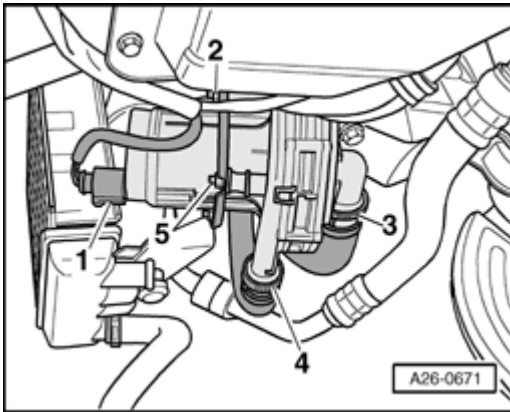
Identifying Hoses, Electrical Connector, Nuts & Secondary Air Injection (AIR) Pump Motor V101
